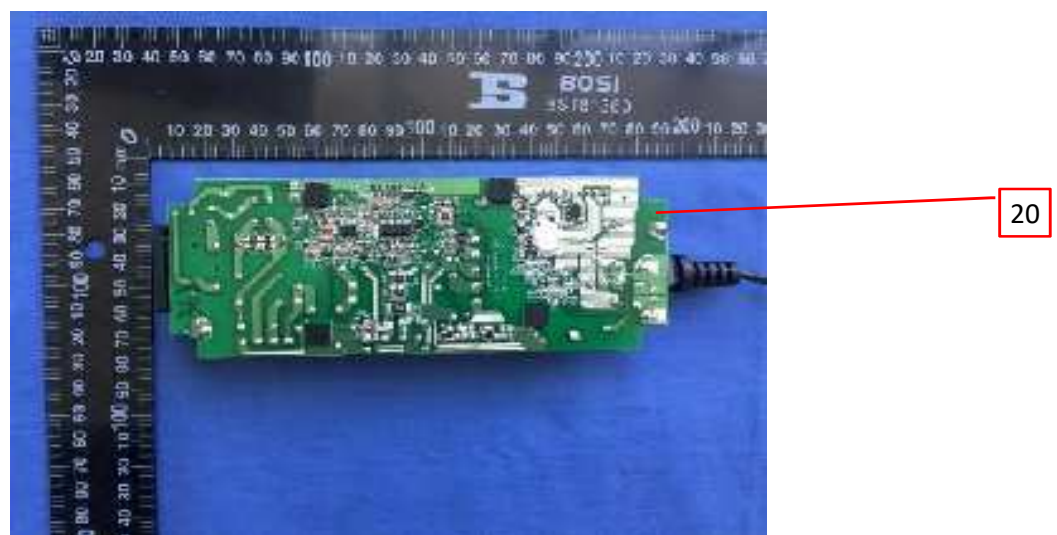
PCB Bottom Side(12.0-36.0V model, Class I)
